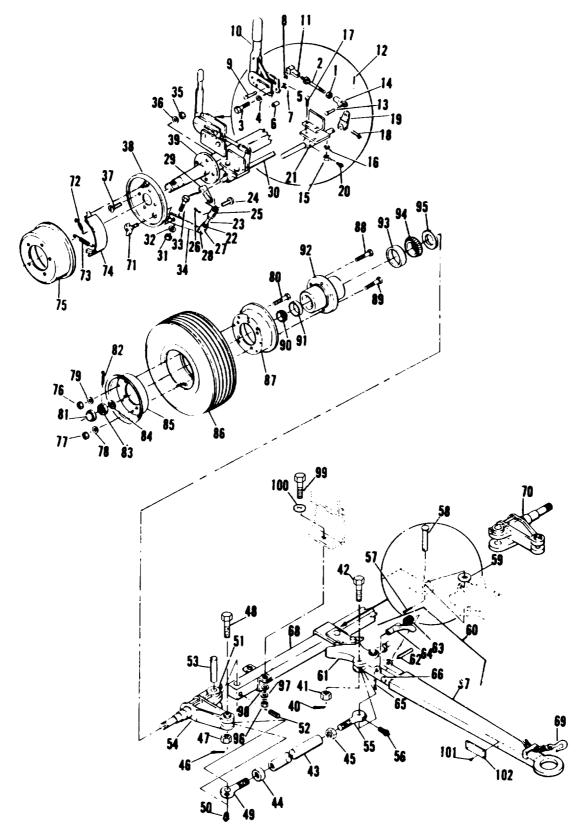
Wheel Mounting Kit, Exploded View (Sheet 1 of 2)
